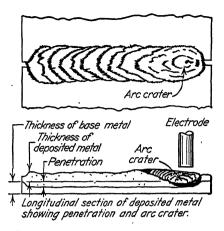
Weld penetration and arc crater. From Gilbert D. Fish, Arc-Welded Steel Frame Structures, McGraw-Hill Book Company.
